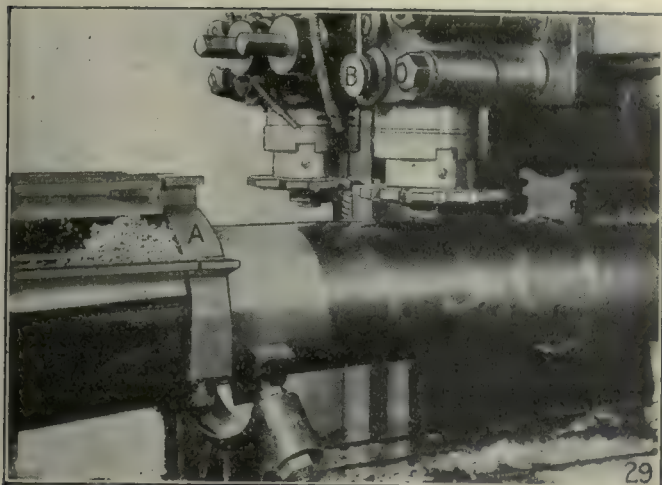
FORM GAGE USED FOR SETTING MILLING CUTTERS
